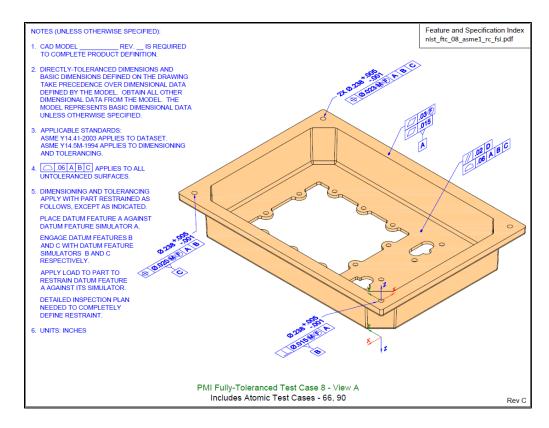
Fully-toleranced test case 8 (FTC 8) drawing
